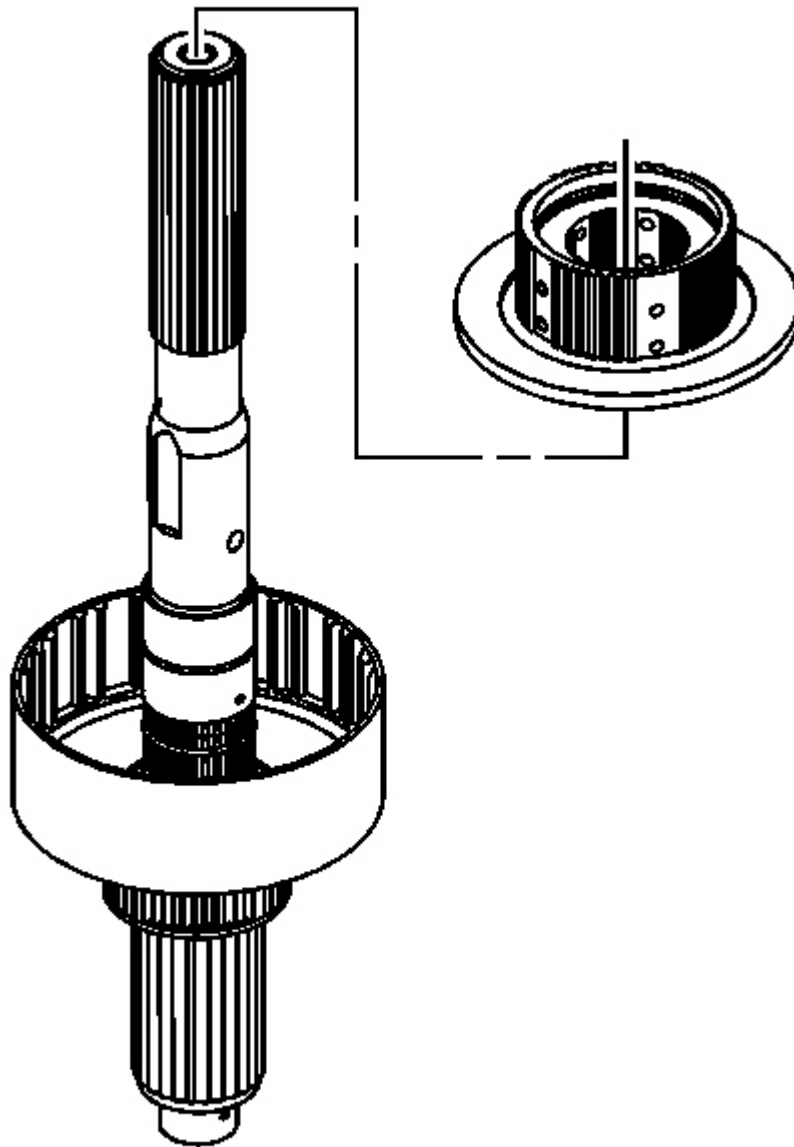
Retaining Ring For The Drive Sprocket On The Clutch Housing
